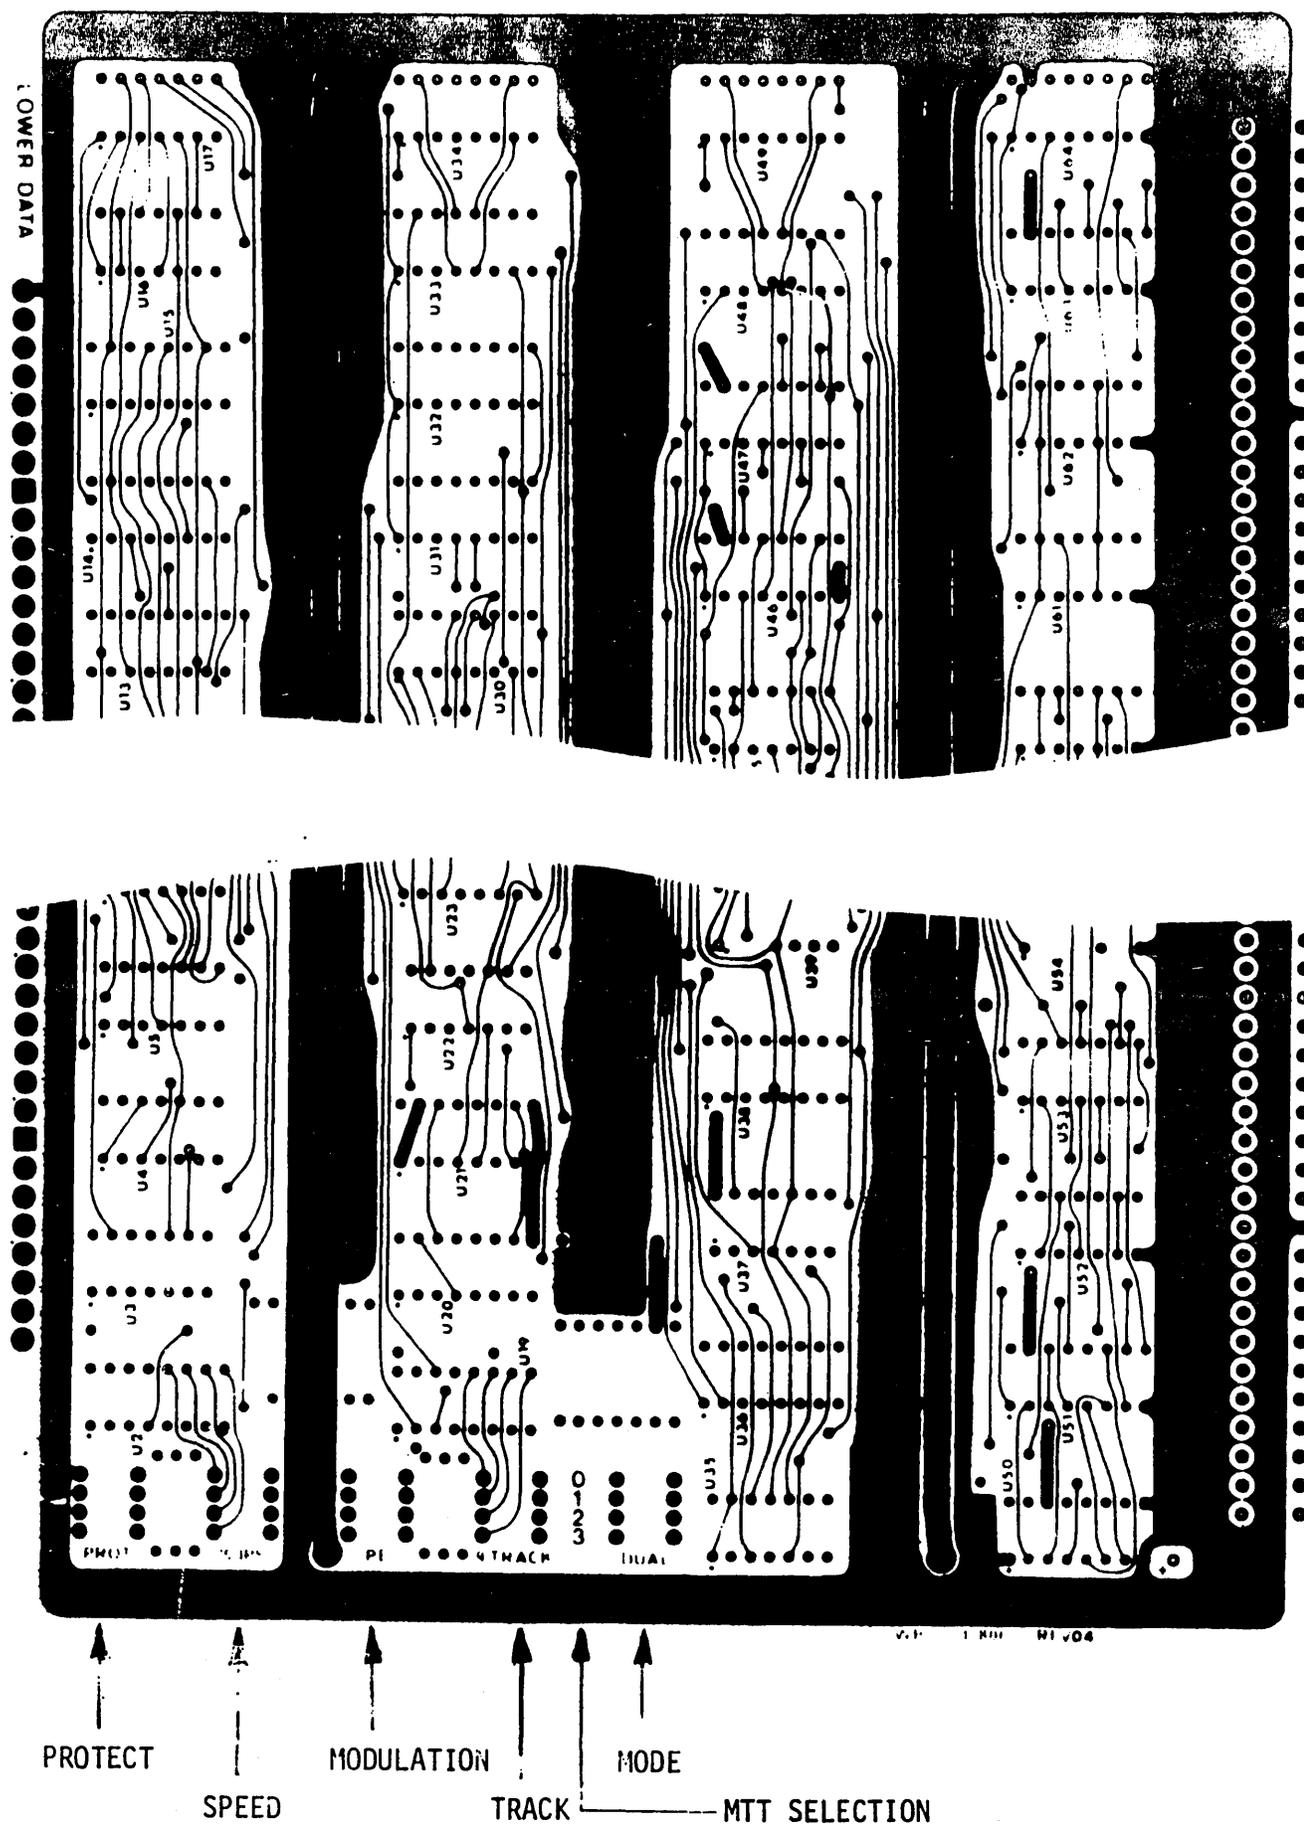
Lower Data Section Showing Jumper Plug Positions
